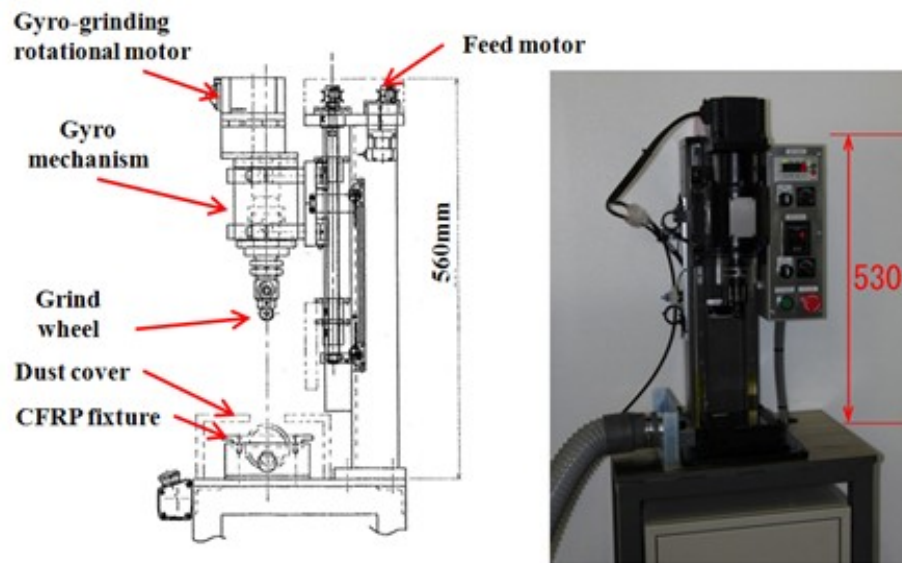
Examples of gyro grinding type drill equipment system for CFRP
